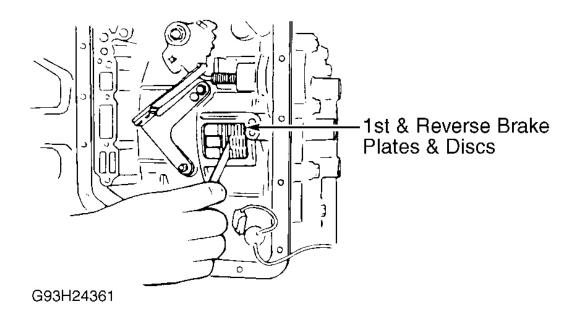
Measuring 1st & Reverse Brake Clearance Courtesy of SUZUKI OF AMERICA CORP.
